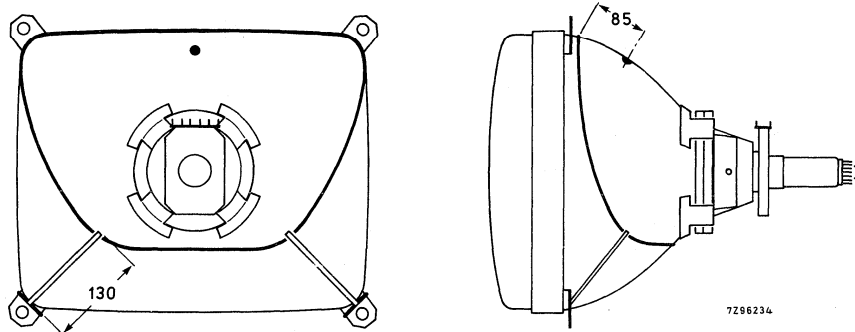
Position of degaussing coil on the picture tube; dimensions are given in mm.
